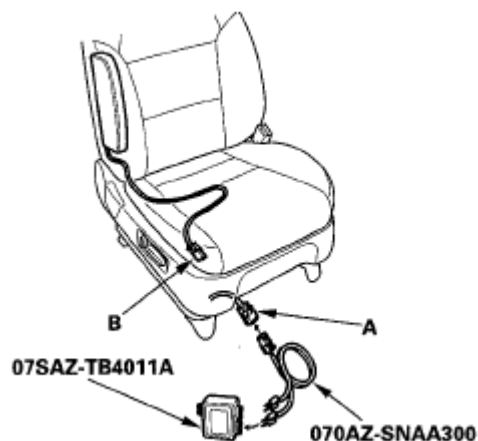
Identifying Floor Wire Harness 2P Connector And Front Passenger's Side Airbag
